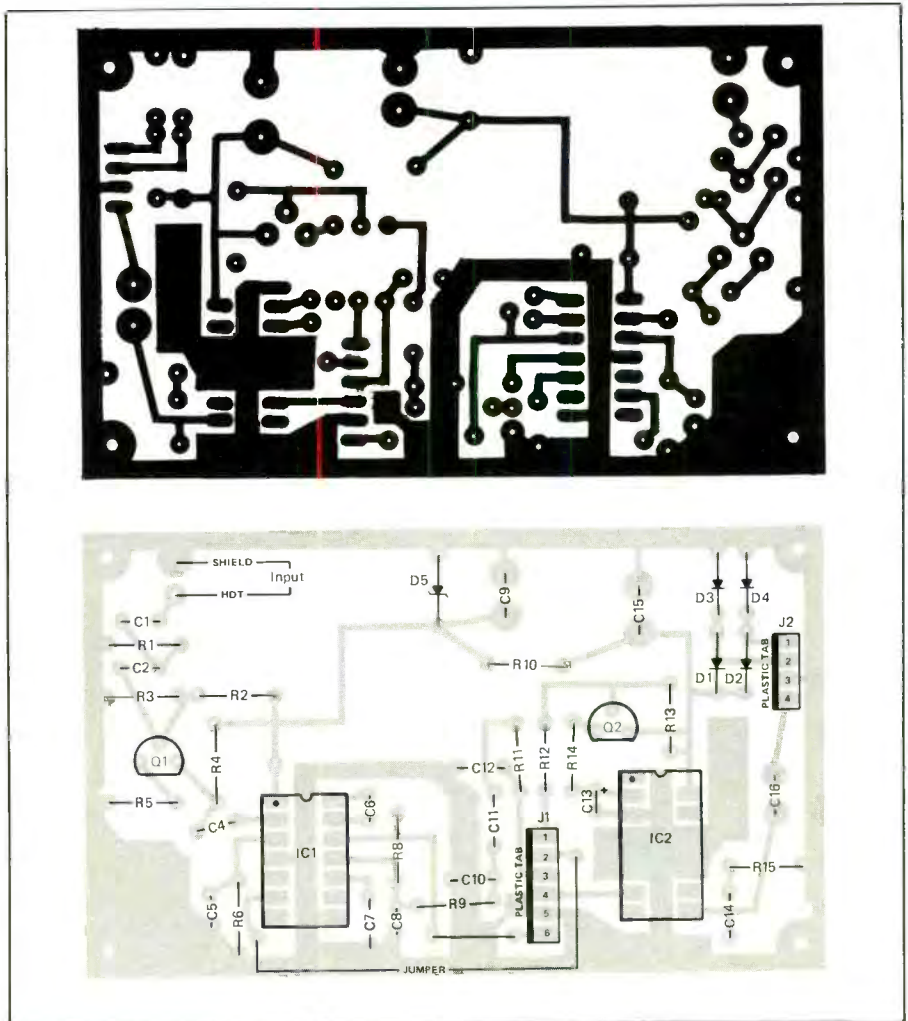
Shown at the top is the actual-size etching-and-drilling guide to use when fabricating your own printed-circuit board. Install components on this board as shown in placement/orientation diagram at the bottom.
